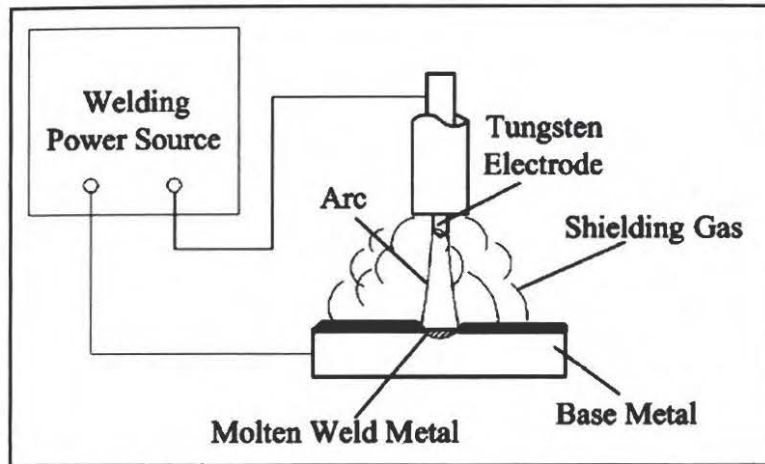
Schematic diagram of the TIG welding process
